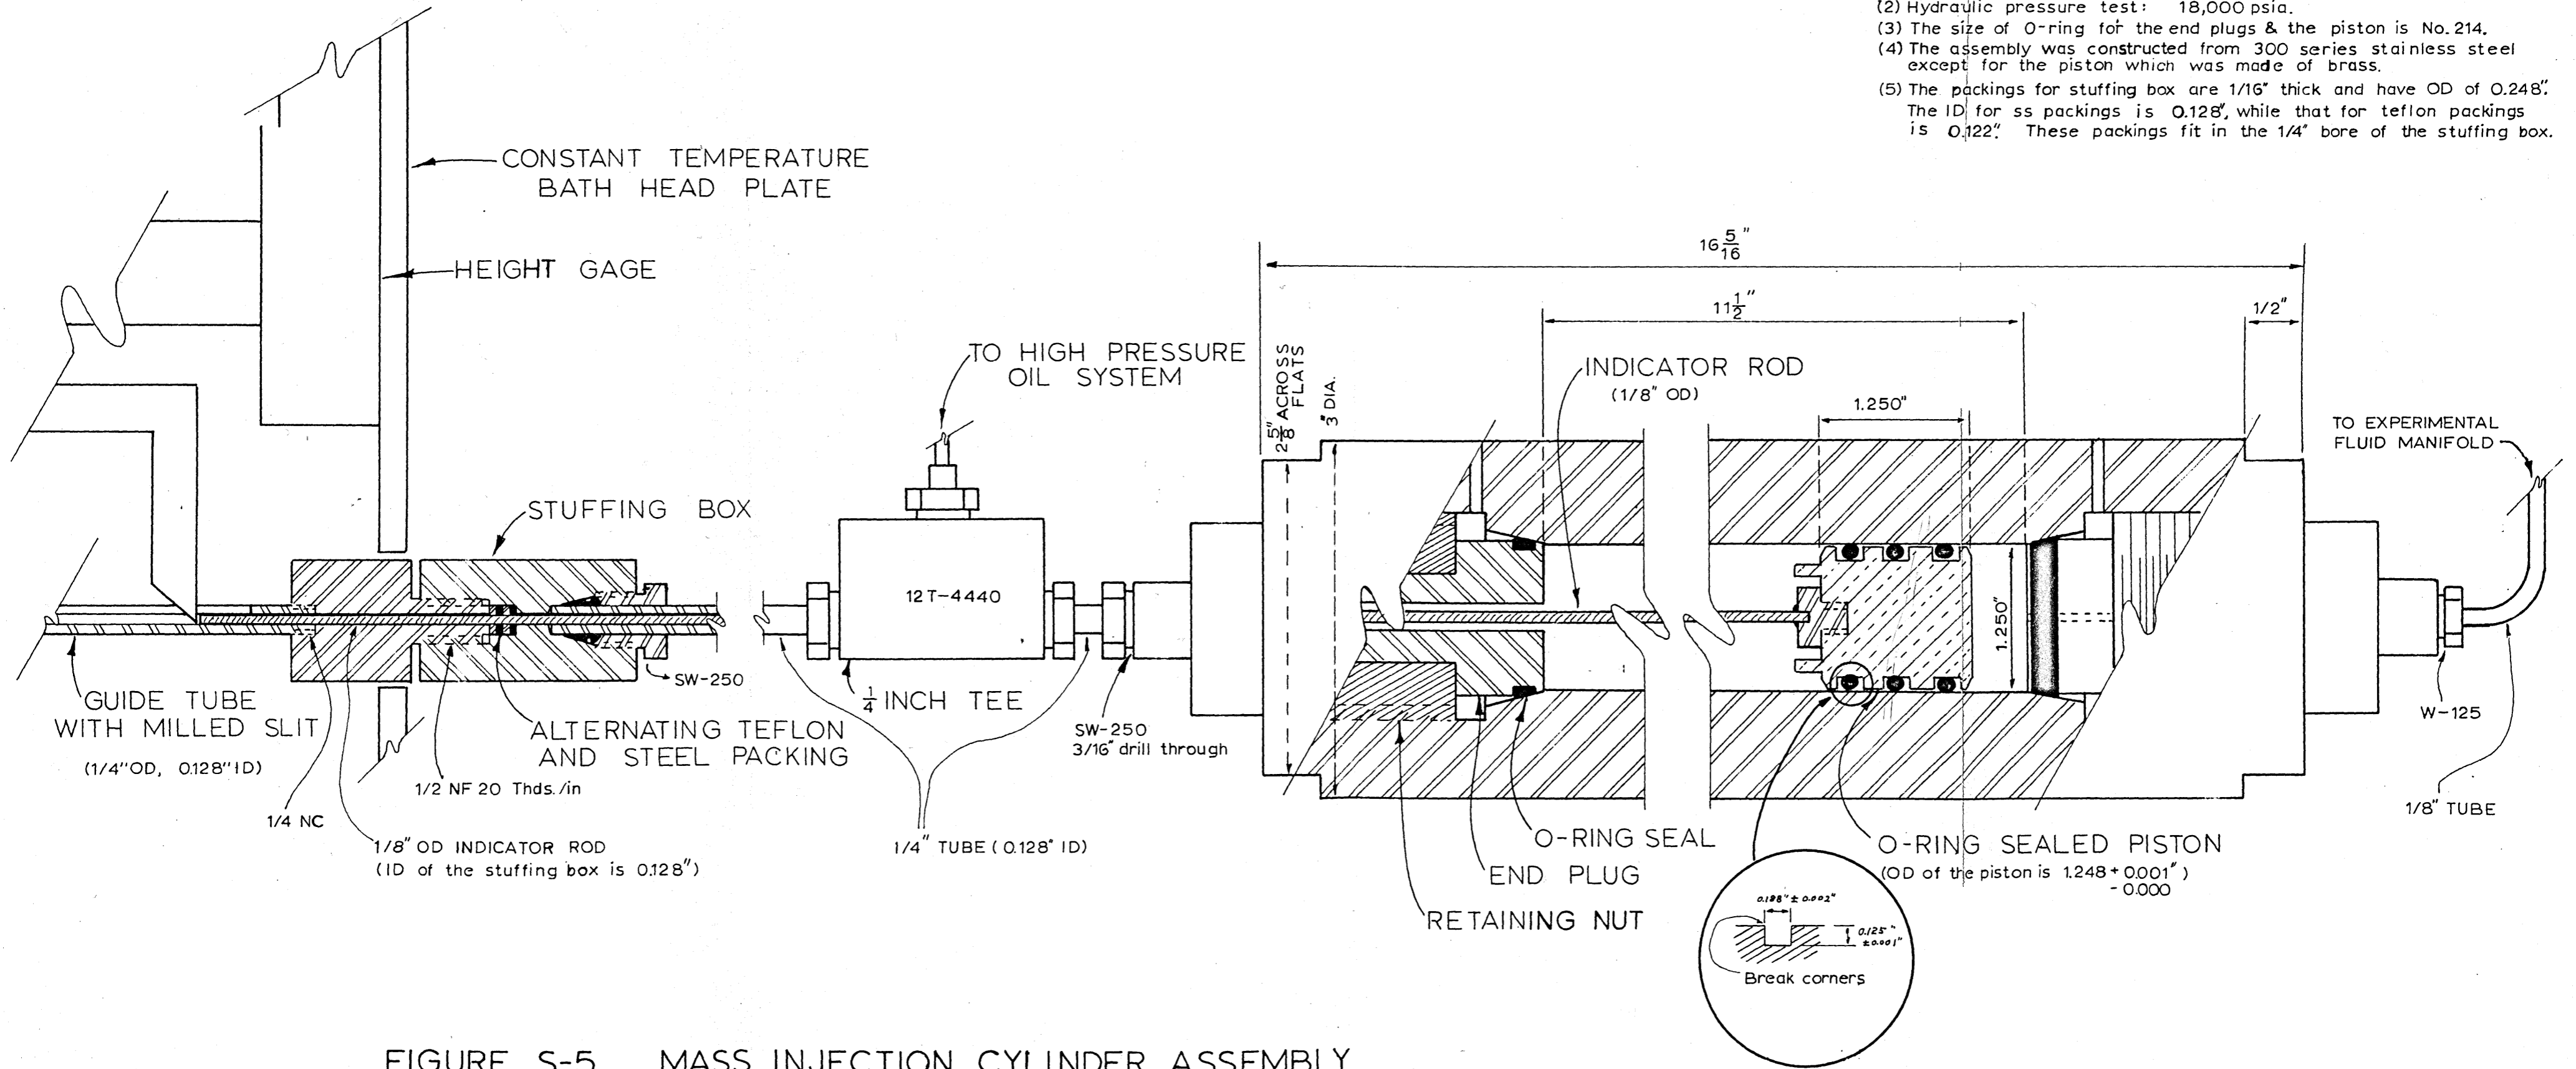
MASS INJECTION CYLINDER ASSEMBLY
